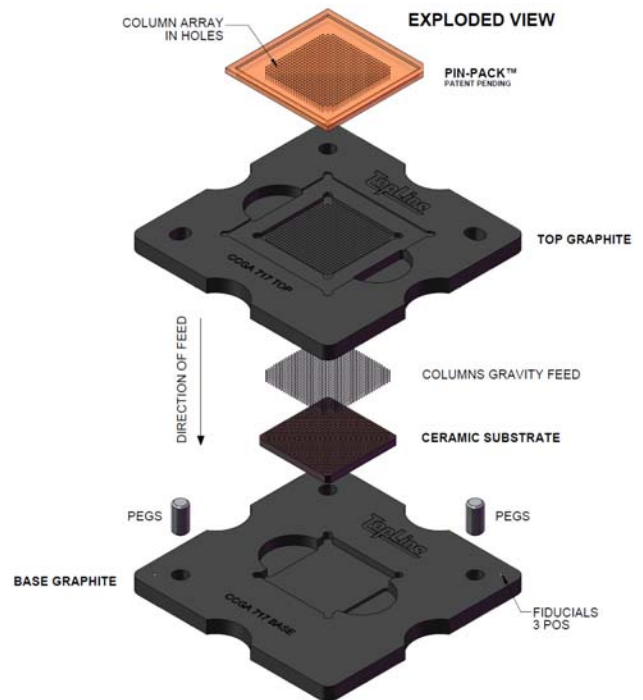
Exploded view of graphite system with Pin-Pack pre-loaded with solder columns. Columns fall and exit the bottom side of the Pin-Pack by means of gravity and drop into the graphite fixture.
